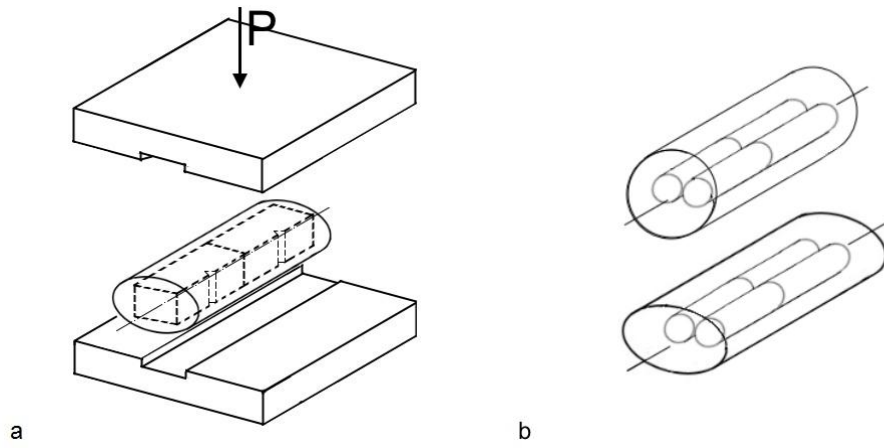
Forging scheme (a) and cutting scheme of an impact bending samples (a) and tensile samples (b) for the UFG Grade 5 Ti billets.
